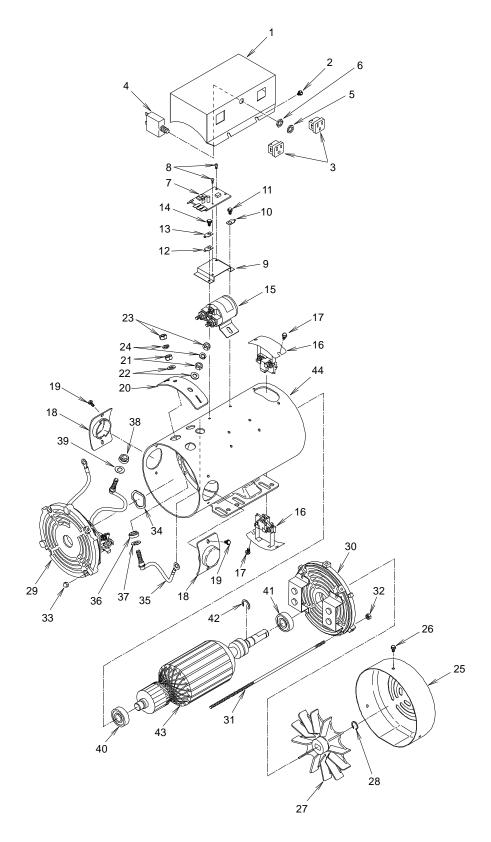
24-Volt Large Frame Generator, Earlier Version
